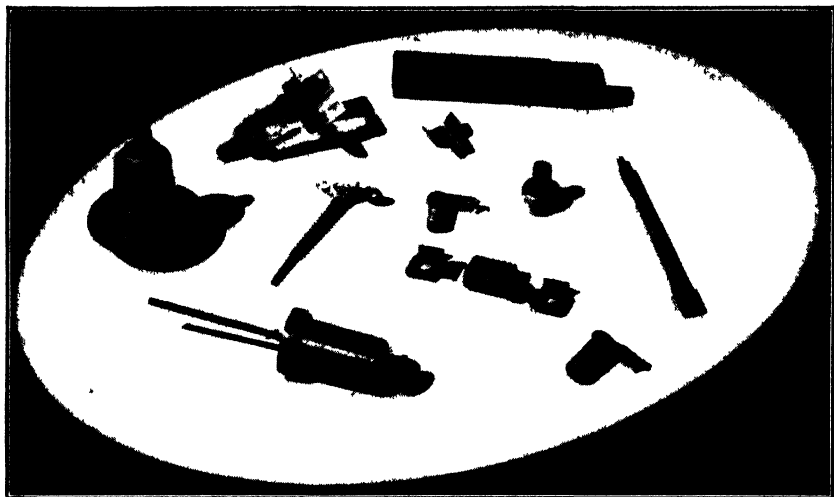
Parts inductively brazed with a 5-kilowatt electronic heater. (Courtesy General Electric Company.)
